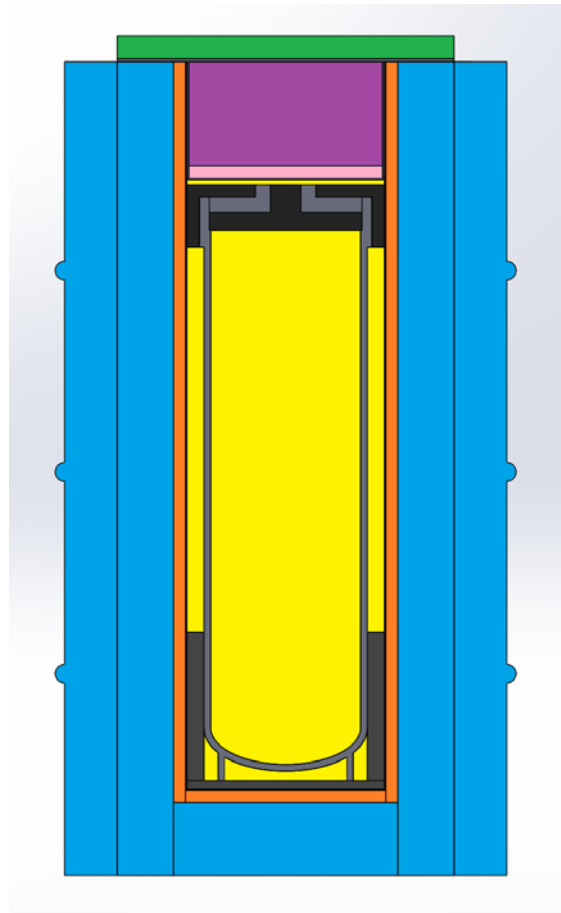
9977 Package geometry – cross-sectional view through the center of the package.
